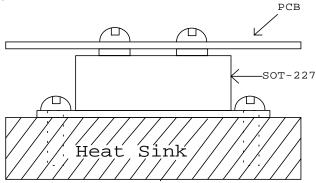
Evaluation board side view showing a SOT-227 power device installed in a high power configuration.
